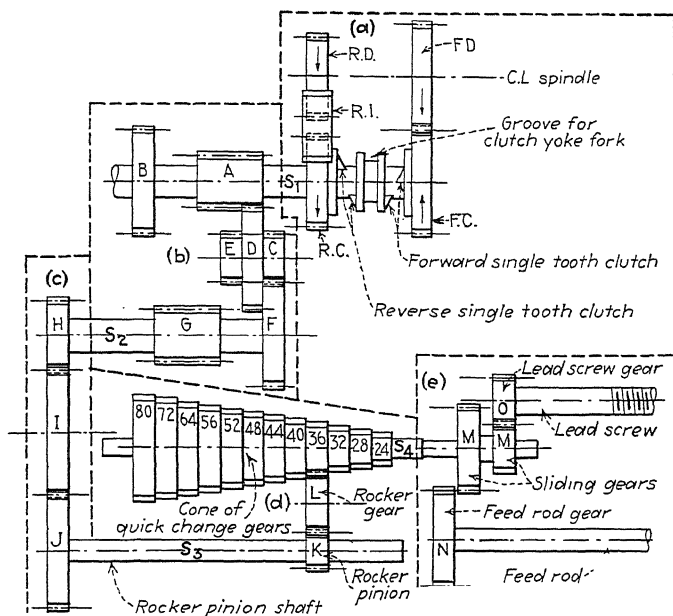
Shows the gearing from the main spindle to feed rod and lead screw. The dotted lines dividing the sections a, b, c, d, and e are for clearness.
